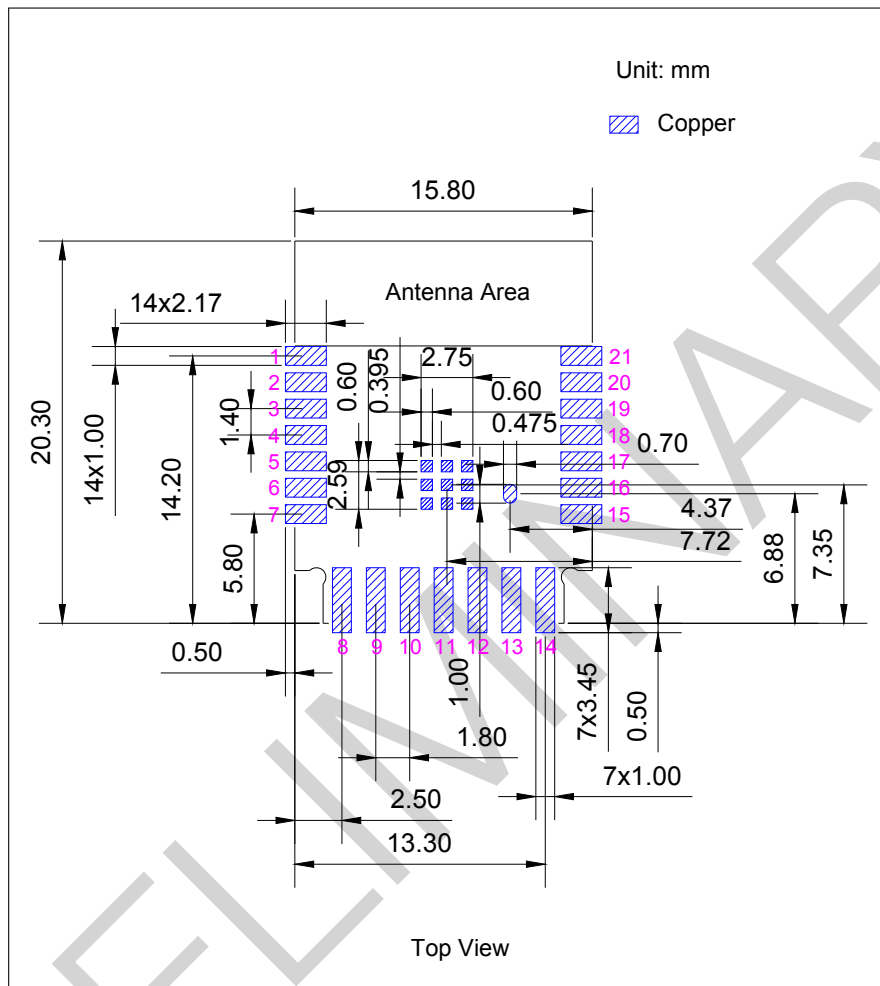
Recommended PCB Land Pattern for SMD Soldering
